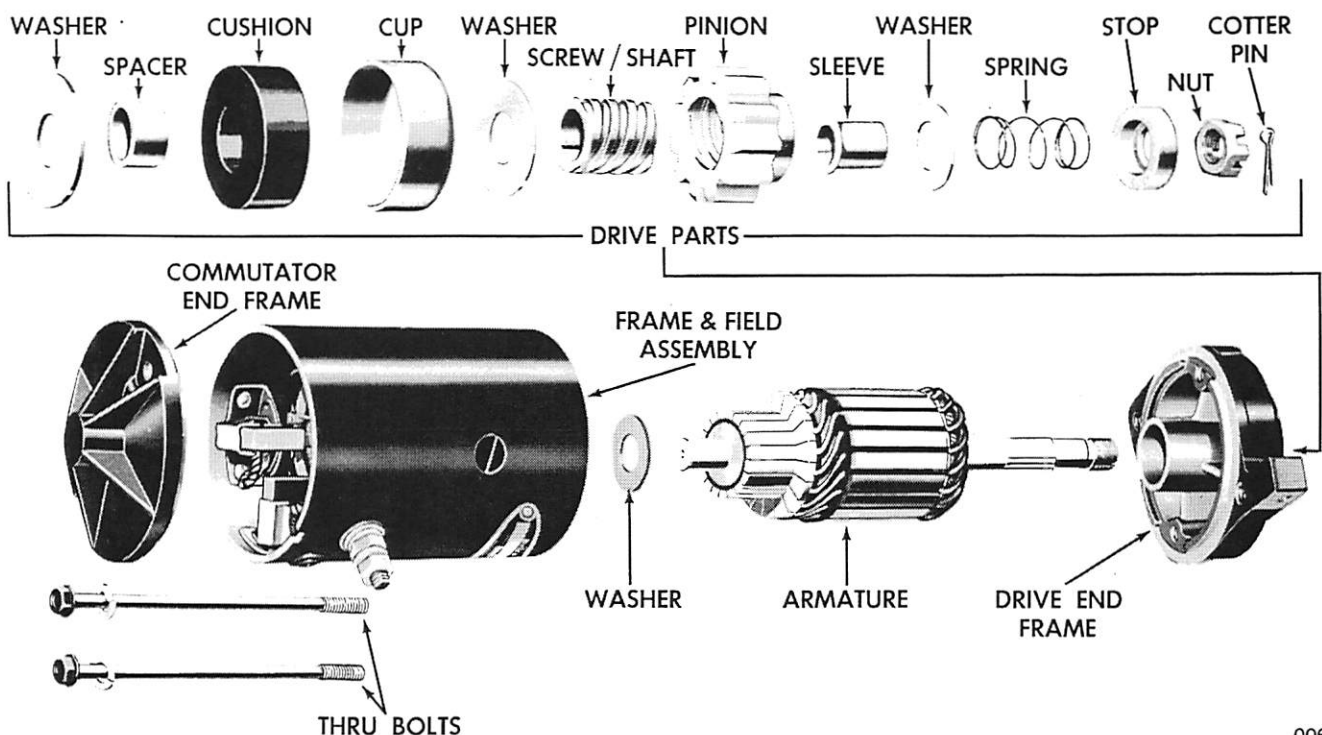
Exploded View of Starter Motor and Mechanism, Delco-Remy
